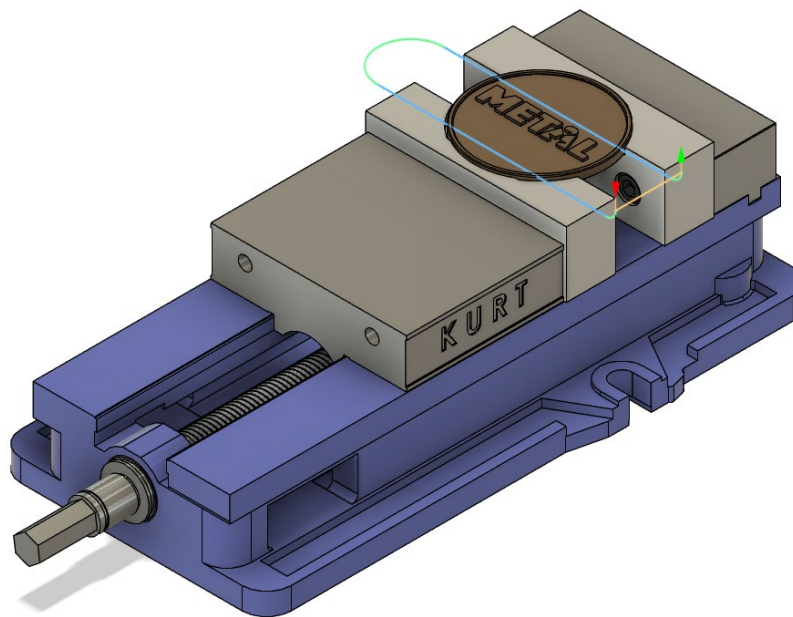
CAD model of the machining setup for the METAL medallion with visible toolpaths.
